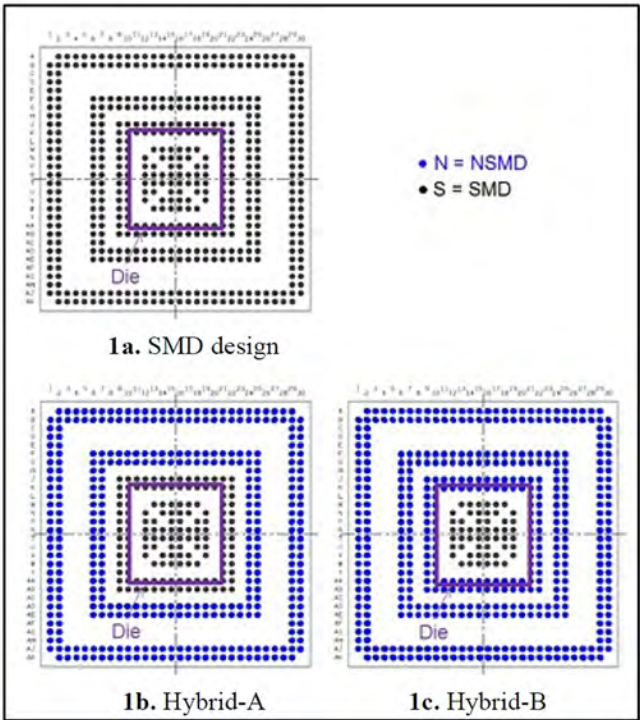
BGA footprint showing arrangement of SMD and NSMD pads for the three different designs.
